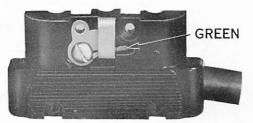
Position of Three-Pin Terminal Body Half when assembling lead.
